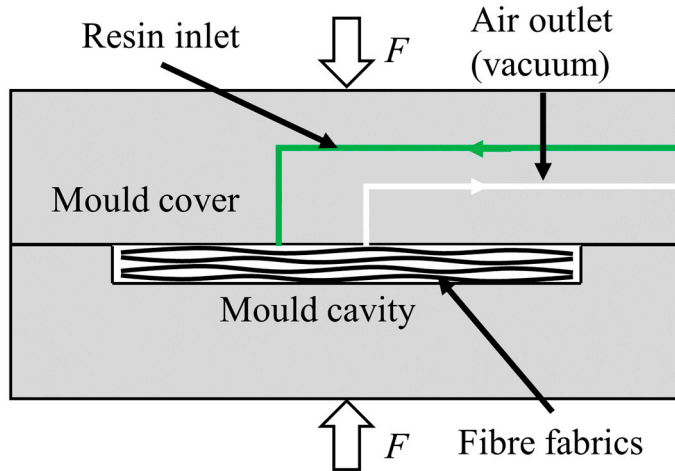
Schematic illustration of resin-transfer moulding for CFRP manufacturing.
